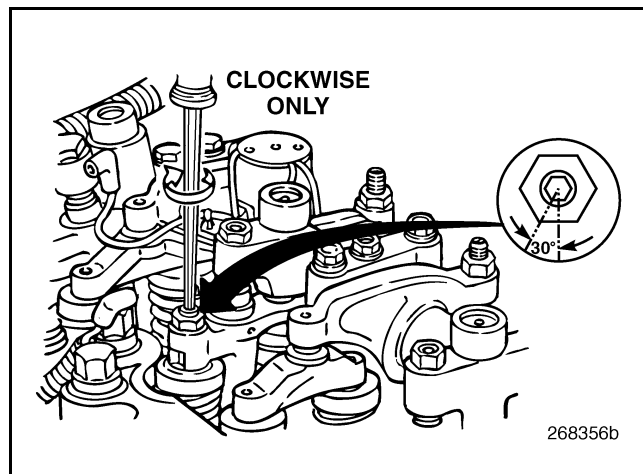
Turning Adjusting Screw an Additional 30-Degree Turn
